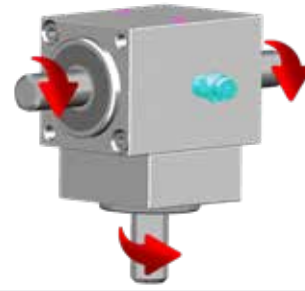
Gearboxes with 3 outputs - Winkelgetriebe mit 3 Ausgänge
